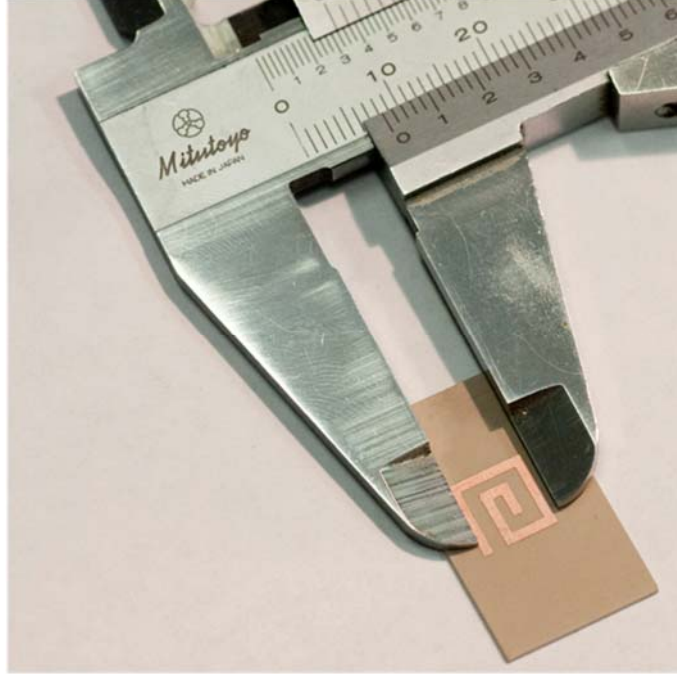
Vernier calliper was utilized to accurately mark the pin hole positions before the drilling.
